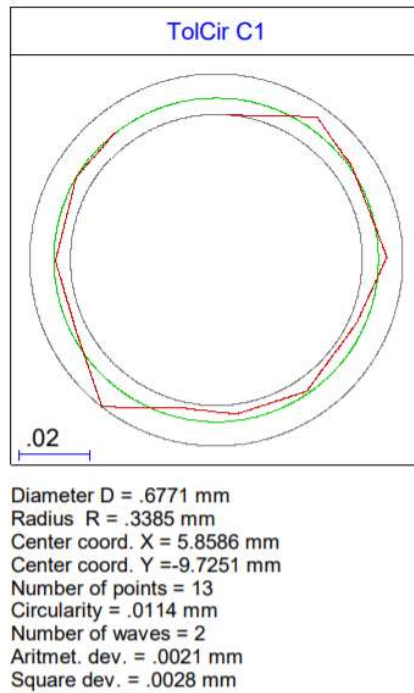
Terminal inner dimensions measurement report (Hošek, modified)
